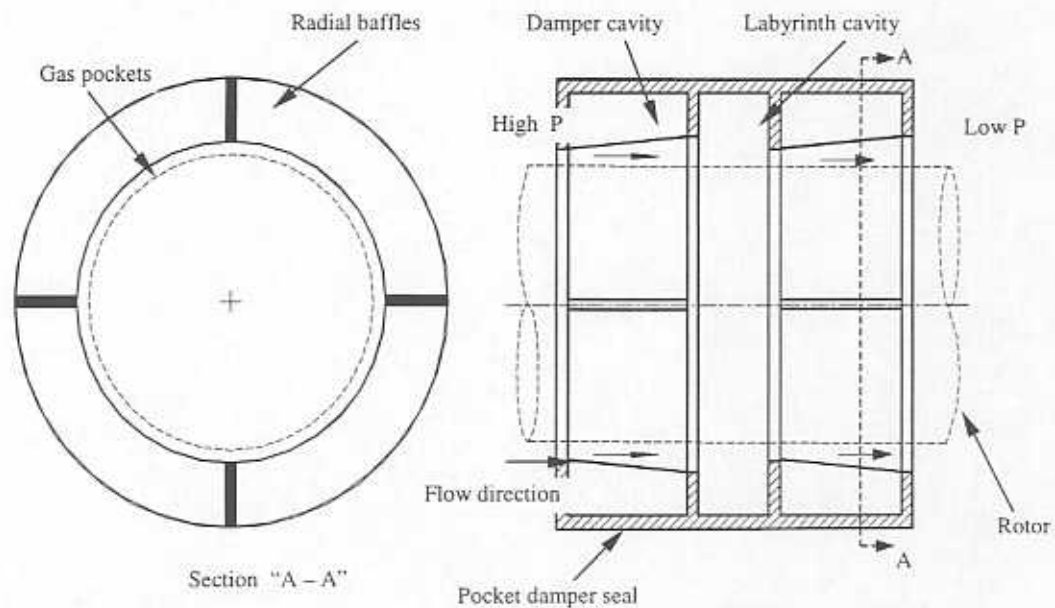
Schematic of a four-tooth, four-pocket gas damper seal
